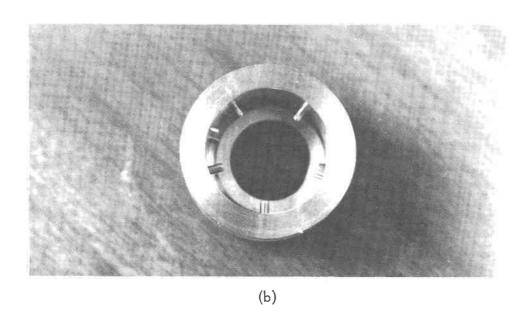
Waukesha Five-Pad Tilting-Pad Journal Bearing Housing
